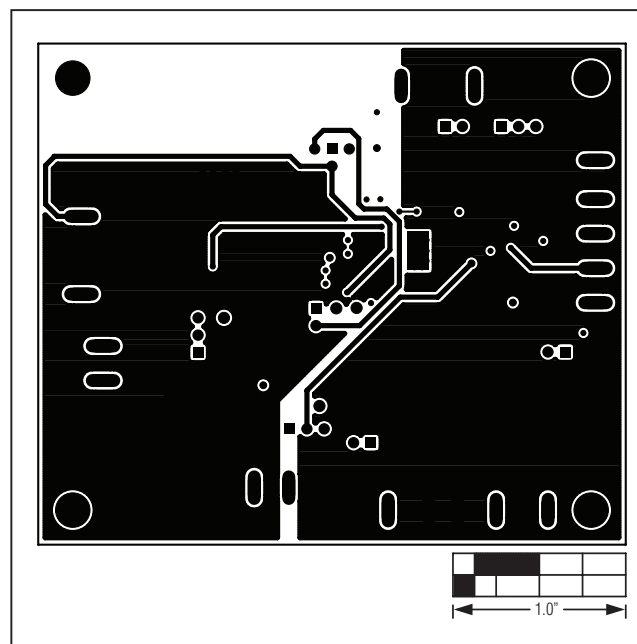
MAX16929 EV Kit PCB Layout—Layer 2
